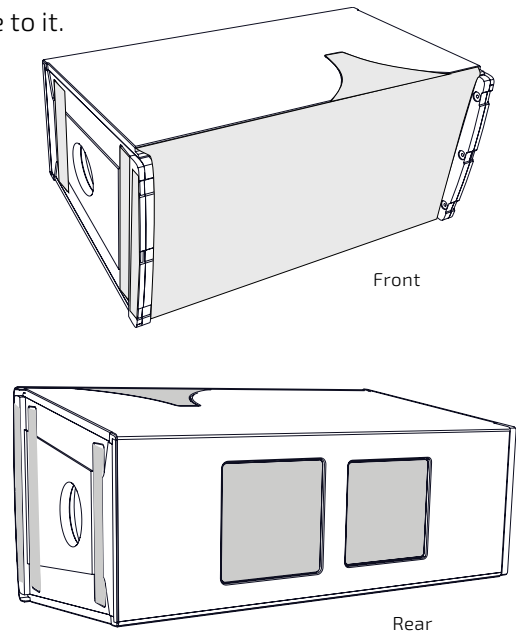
Mask off the internal components, threaded inserts, the horn exterior and rear panels
